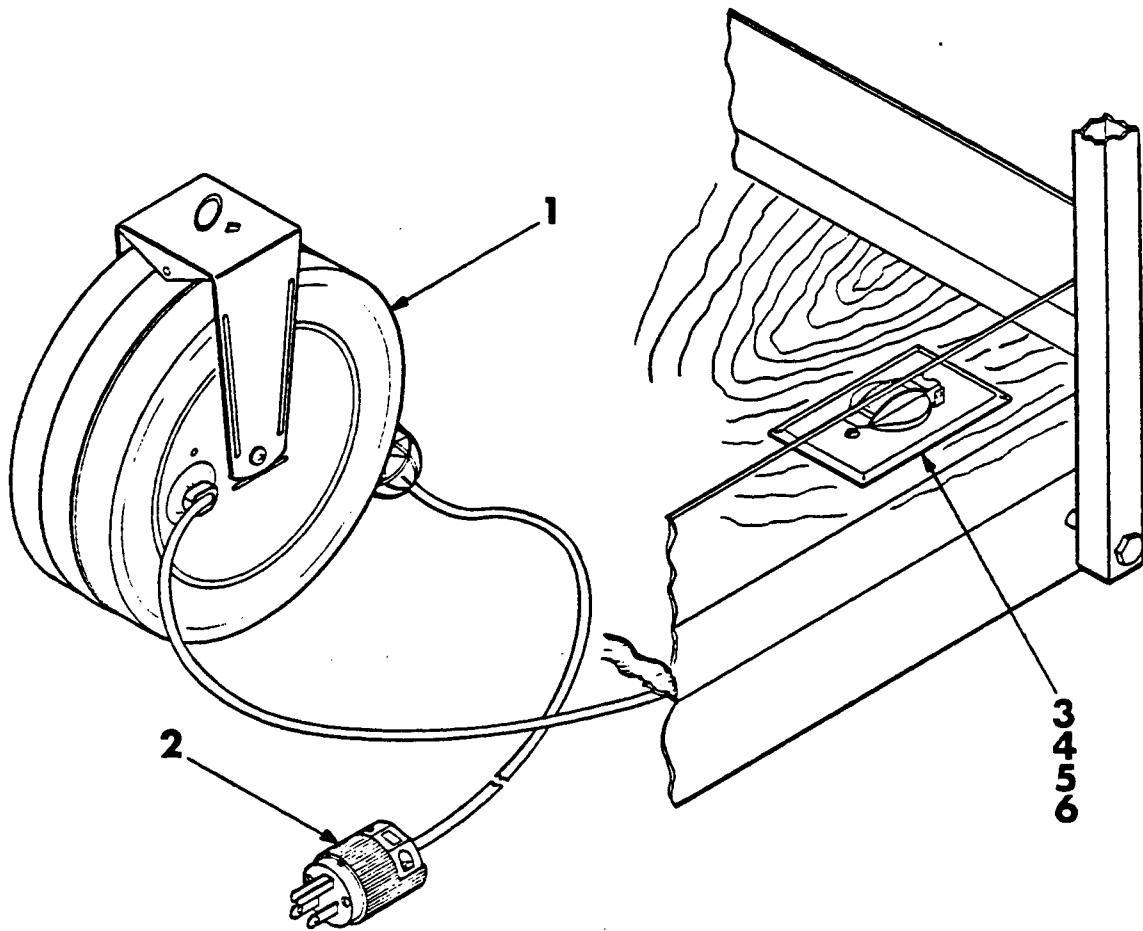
A - PLATFORM ASSEMBLY (30X60)
